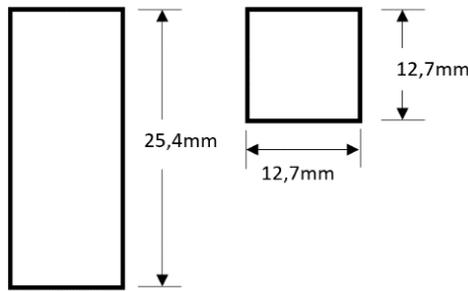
Compressive test specimen with Standard ASTM D695[13]
